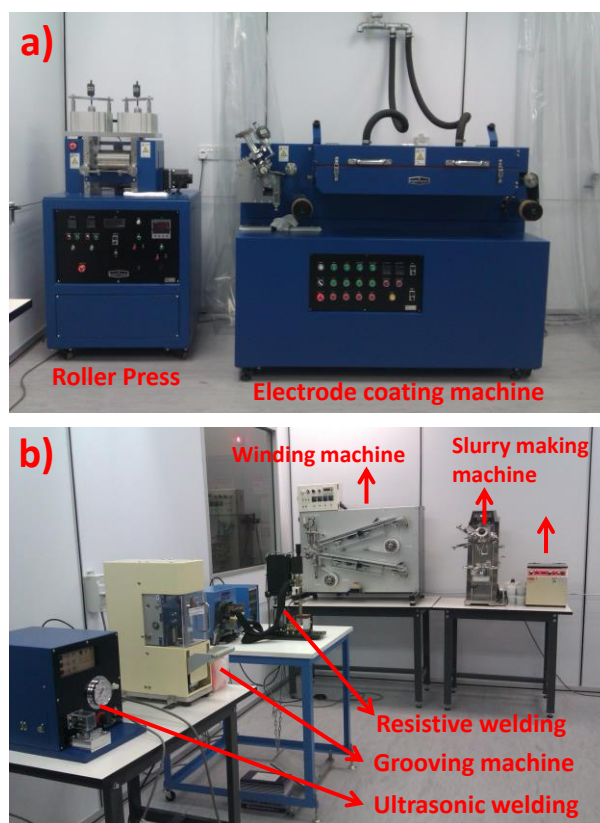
(a) Coating machine and roller press, (b) Ultrasonic welding, grooving, resistive welding, winding machines and slurry making machine.
